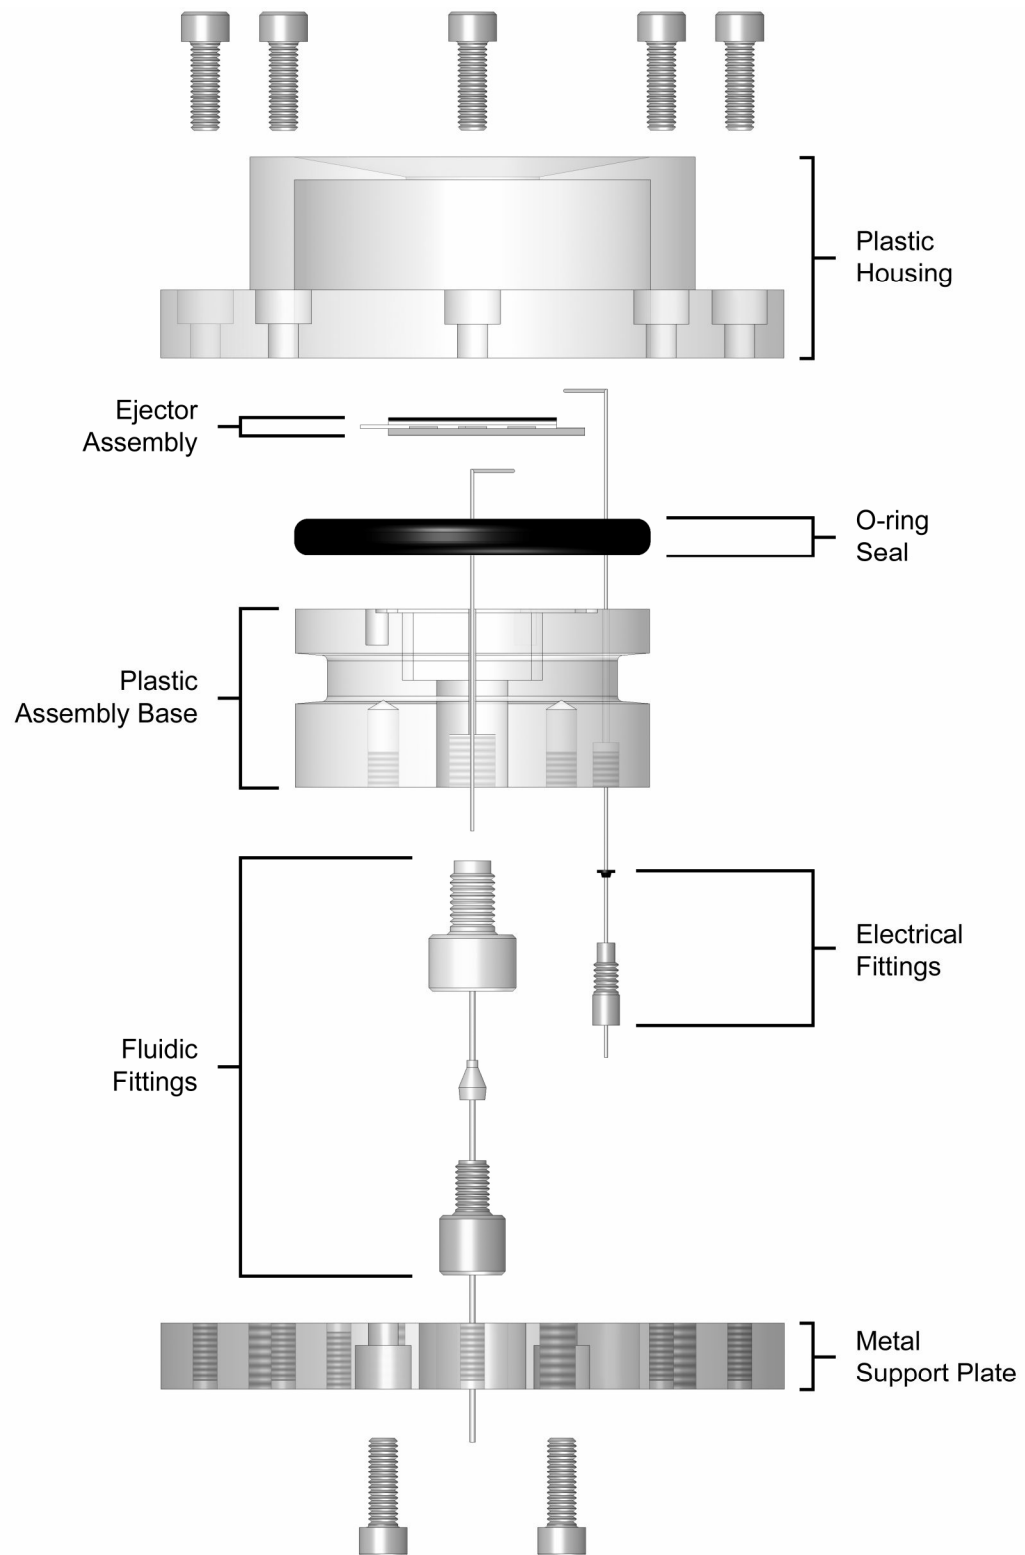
Exploded schematic illustrating how the test section is assembled.
